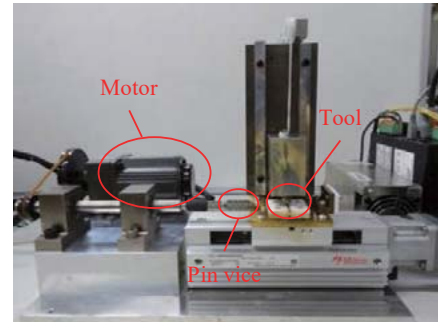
Magnetic fluid grinding machine for producing a micro-sized tension test specimen.
